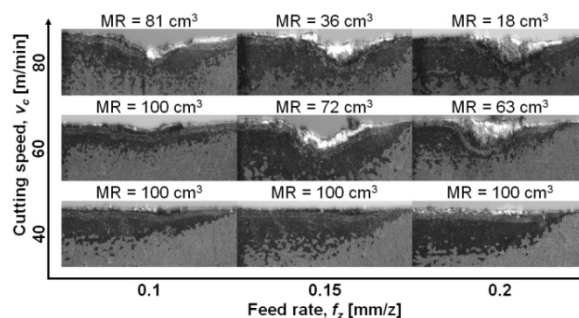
Final tool wear observed on various cutting edges with the correlating cutting speed v_c , cutting feed f_z and total material removed MR
